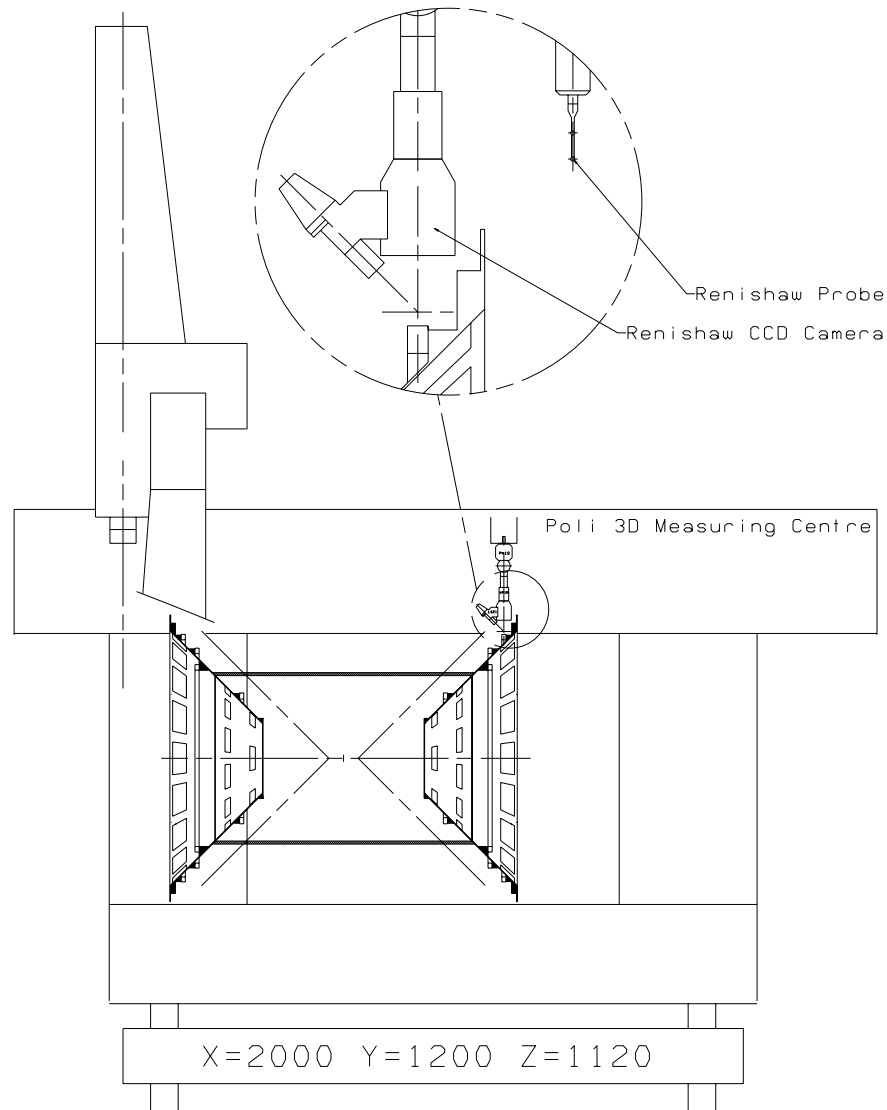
The ITS during assembly on the 3-D measuring machine. For clarity the assembling fixture has been omitted.
